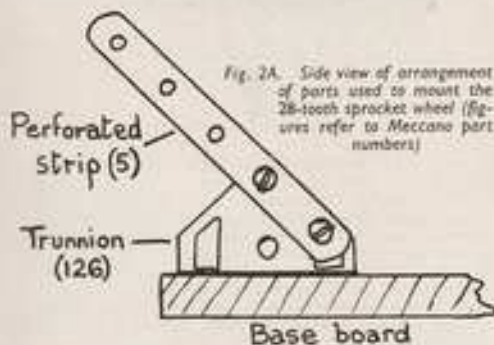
A. Side view of arrangement of parts used to mount the 28-tooth sprocket wheel (figures refer to Meccano part numbers)
